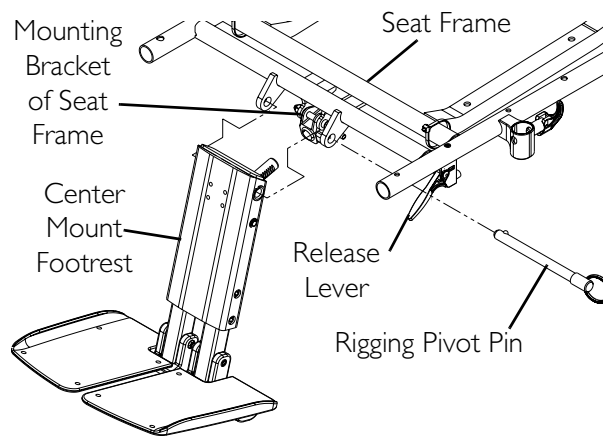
Removing/Installing the Center Mount Footrest
